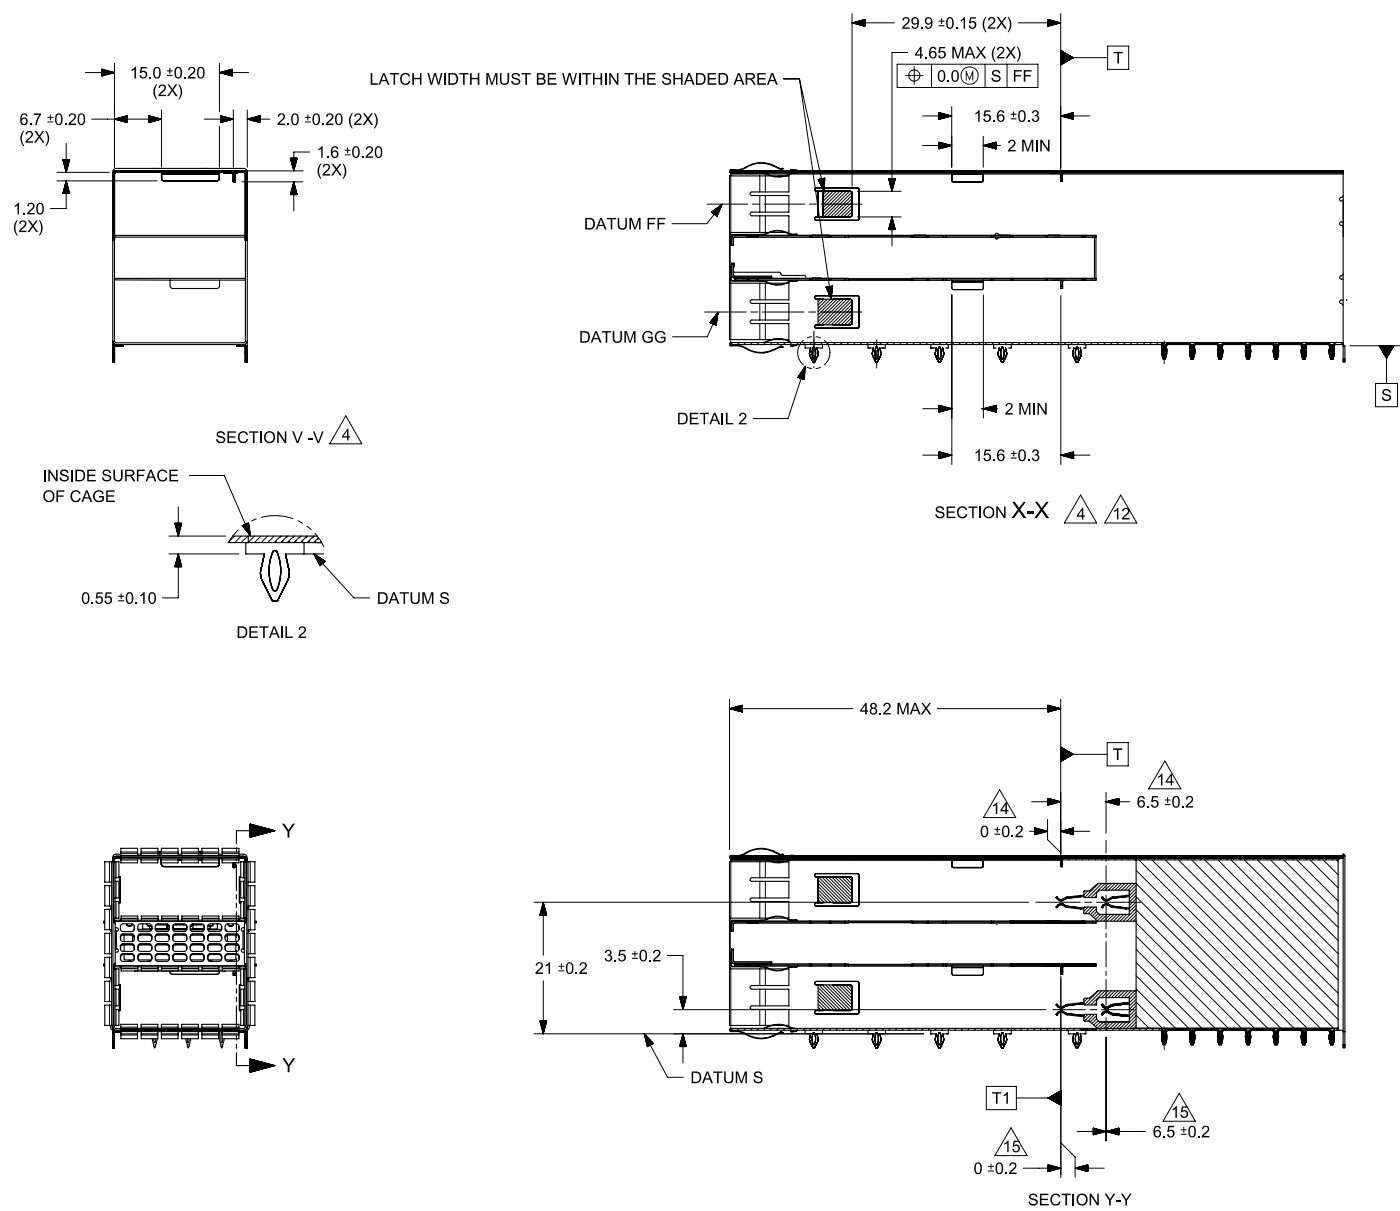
QSFP-DD800 2x1 SMT cage dimensions
